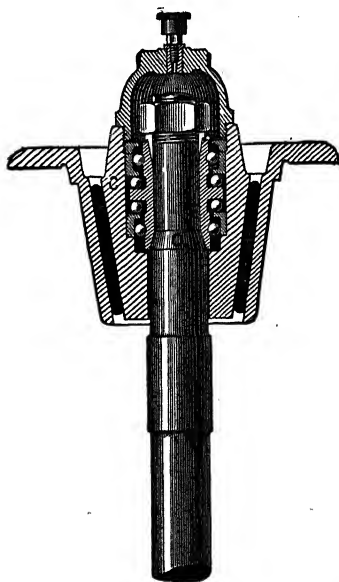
Sectional view of improved method of suspending centrifugals fitted with solid revolving spindles.
